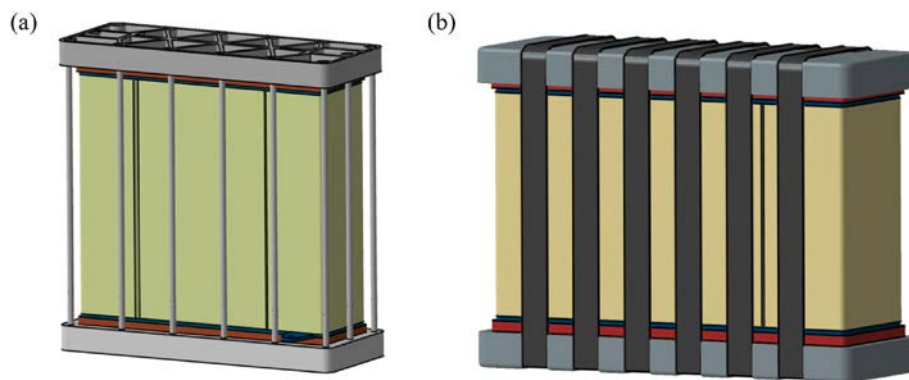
(a) Screw assembly, (b) Strap assembly.
